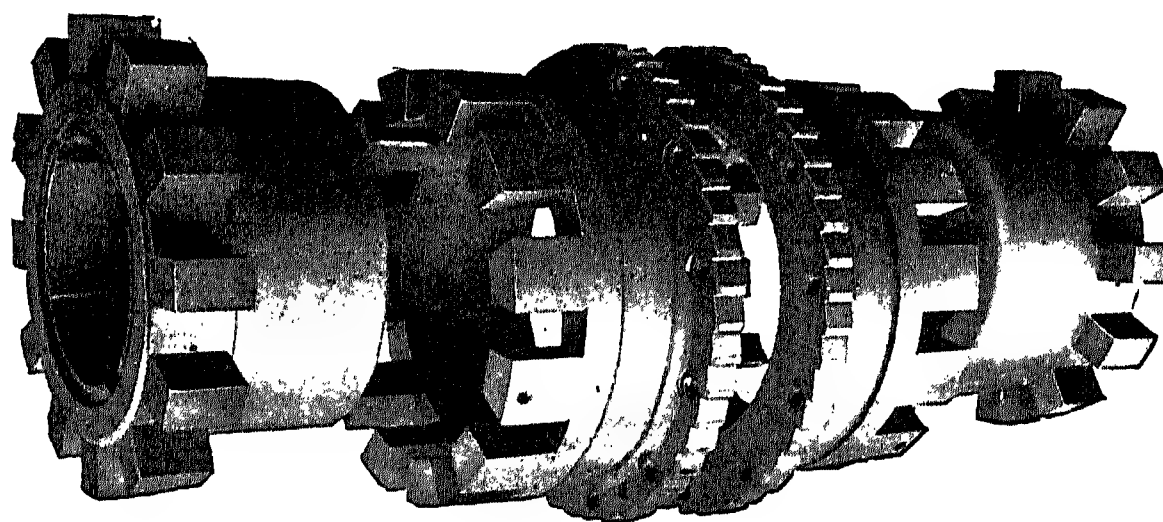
Claw-type Flexible Coupling to Transmit 10,000 h.p.
